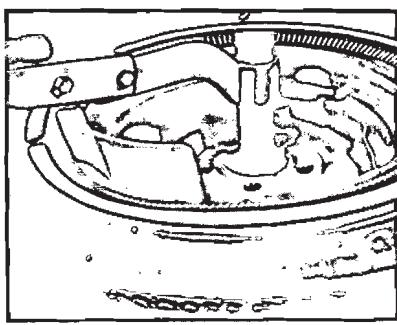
Breaking Top Bead of Tire From Wheel Rim
